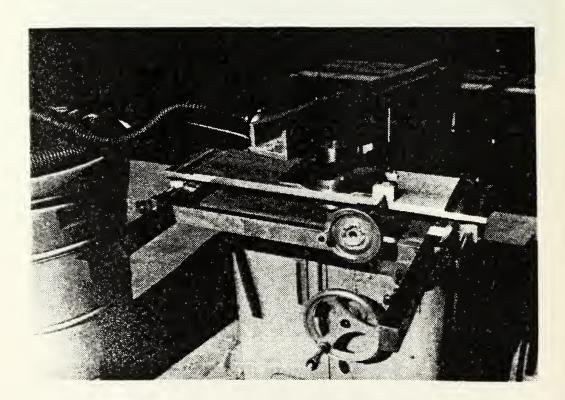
(1) Blade alignment rig using template prior to drilling and reaming blade shaft.
